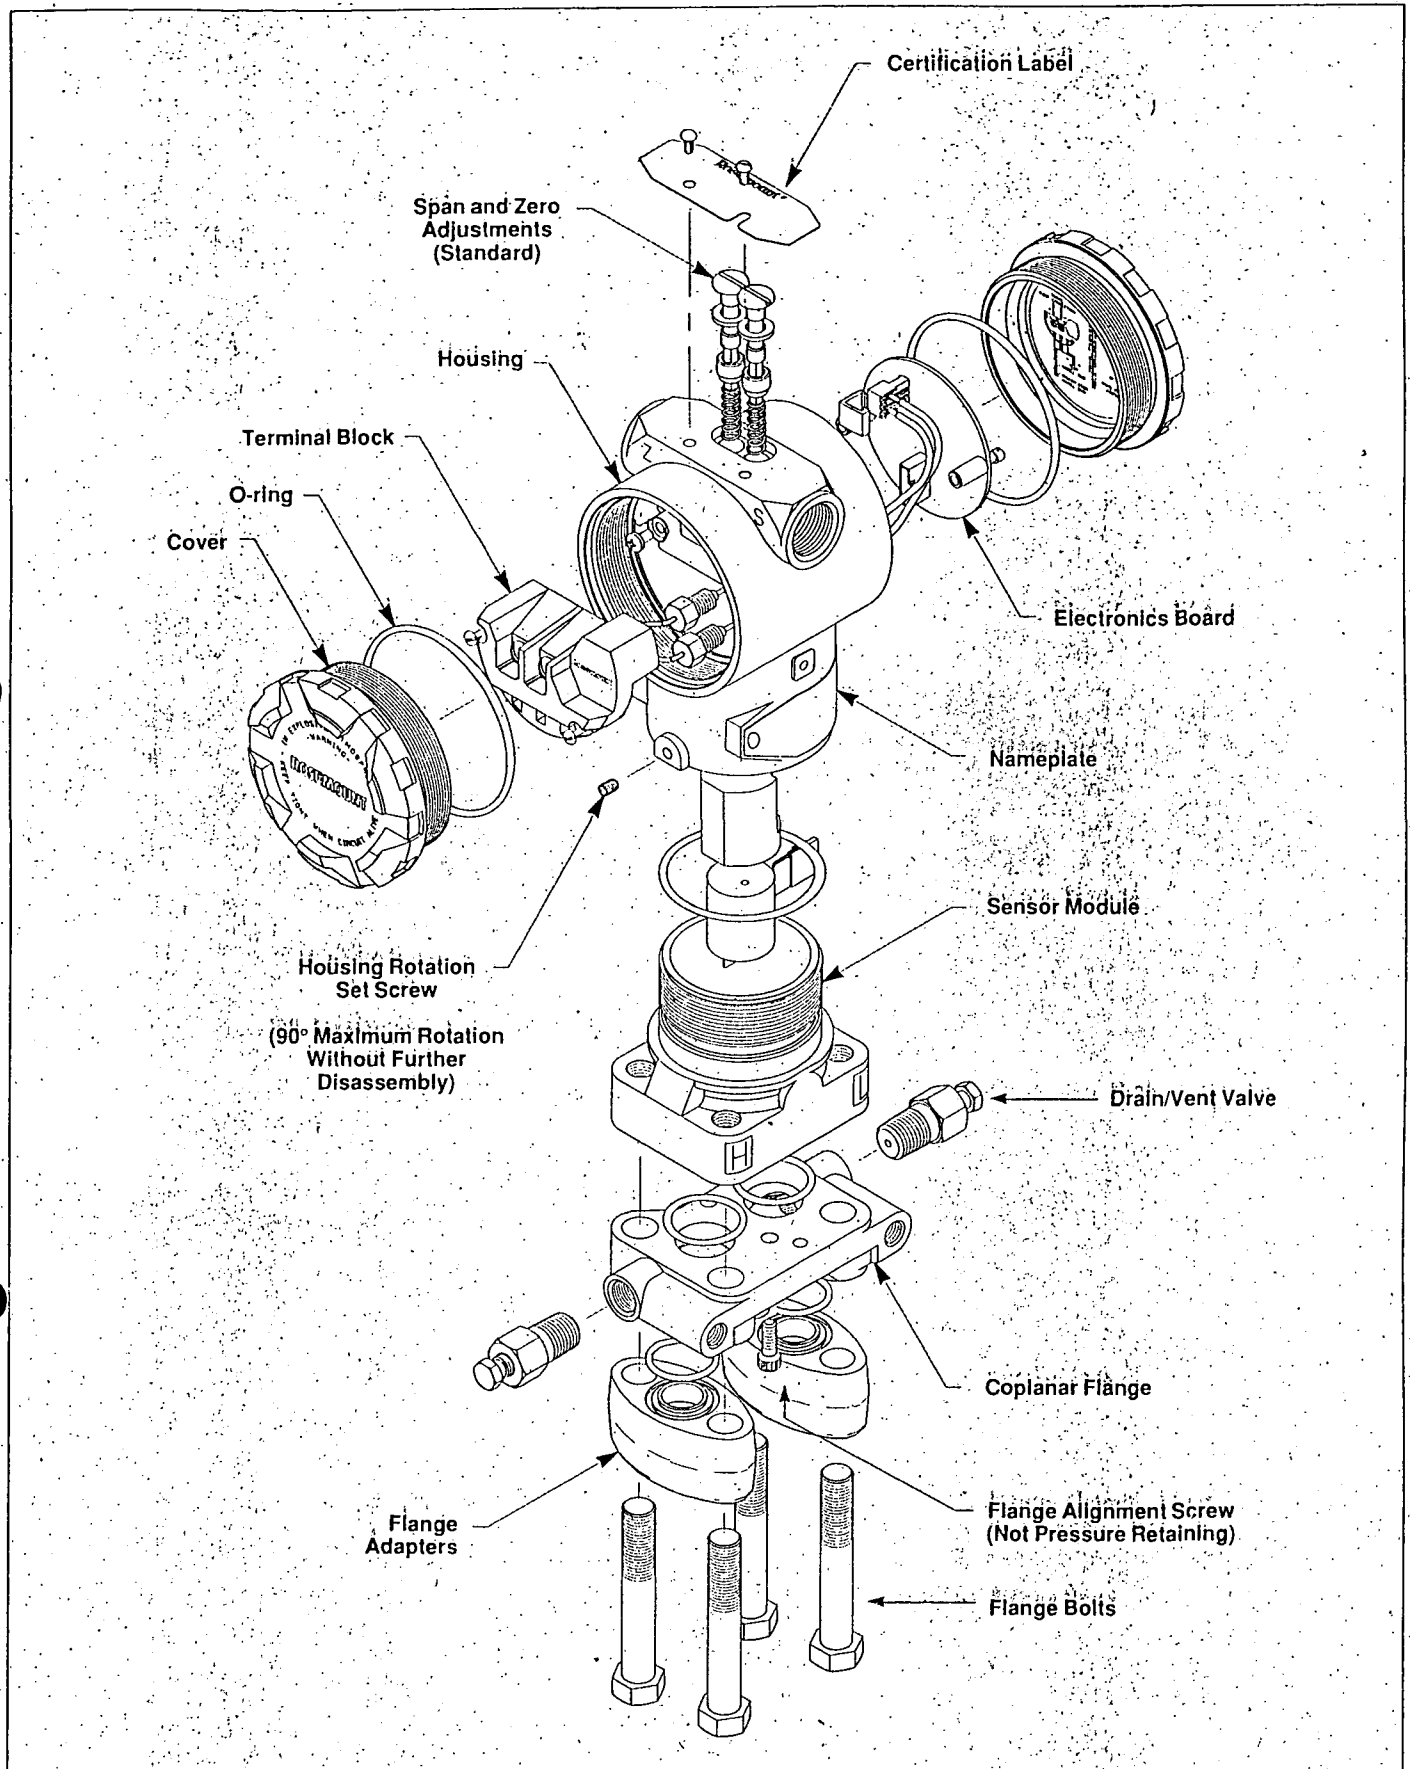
Model 3051C Differential Pressure Transmitter Exploded View
